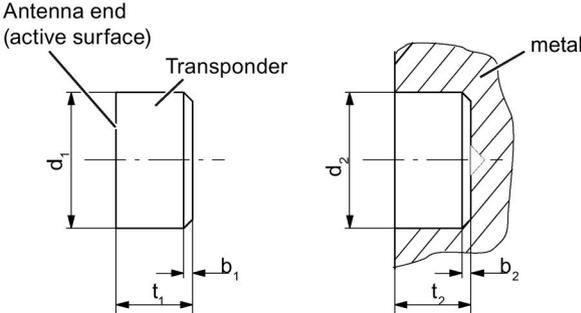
Flush-mounting of MDS D421/D521/E623 in metal with tools
